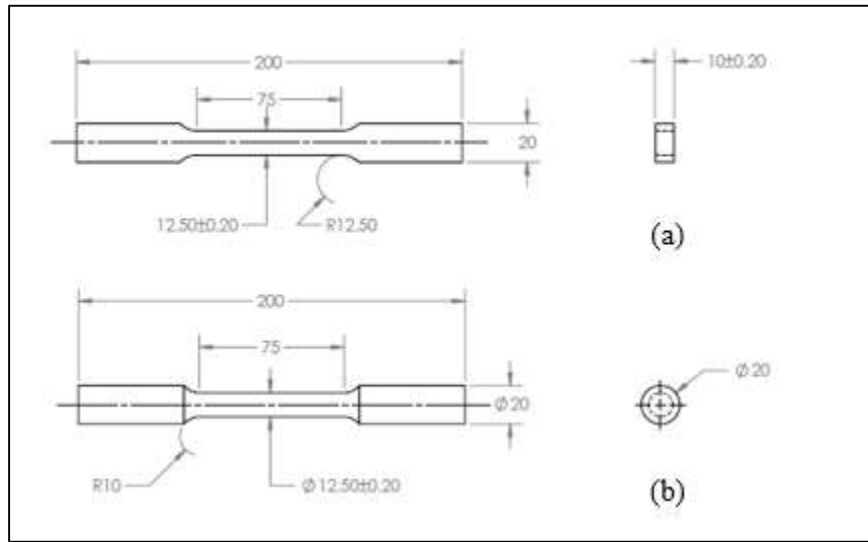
Standard dimensions of test specimens (a) Tensile and (b) Fatigue
